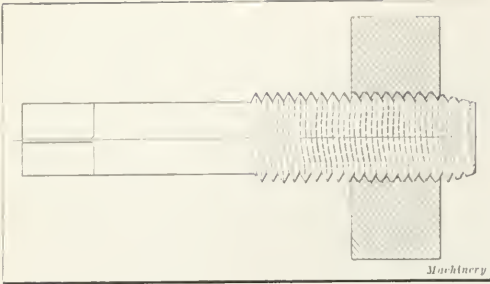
Tap with So-called "Drunken" Thread, which cuts unevenly and produces Oversize and Roughly Threaded Holes
